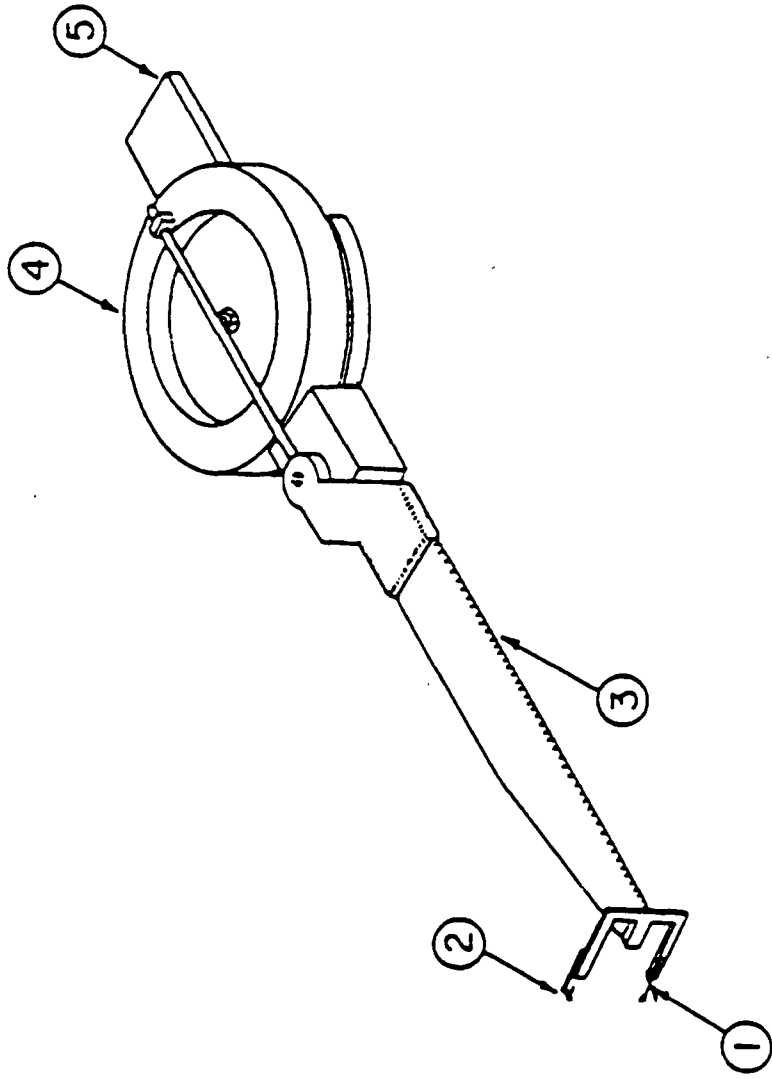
Oscillating Arm Assembly: (1) hot-wire probe; (2) proximity probe; (3) oscillating arm; (4) flywheel; (5) assembly support.
